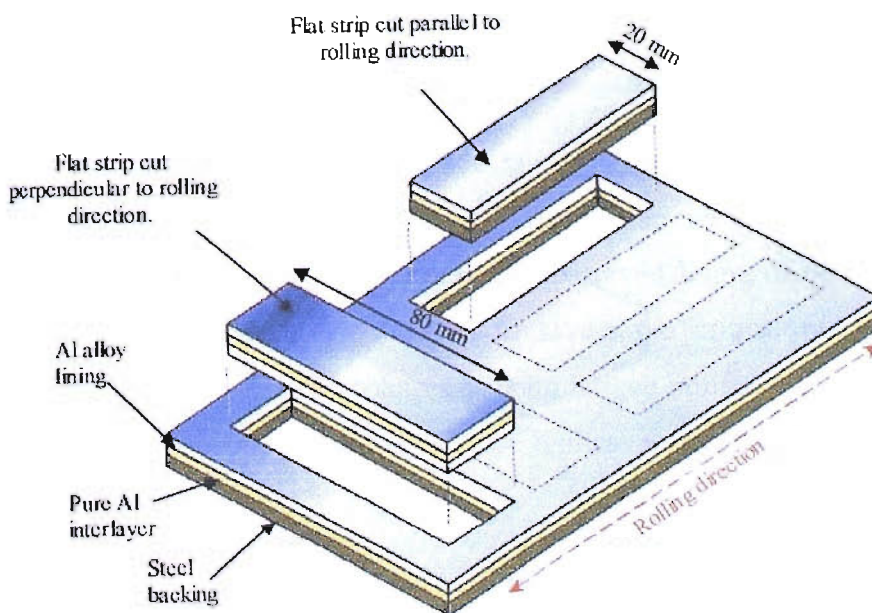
AS16 flat sheet showing bend bar type flat strips cut out perpendicular and parallel to rolling direction¹
